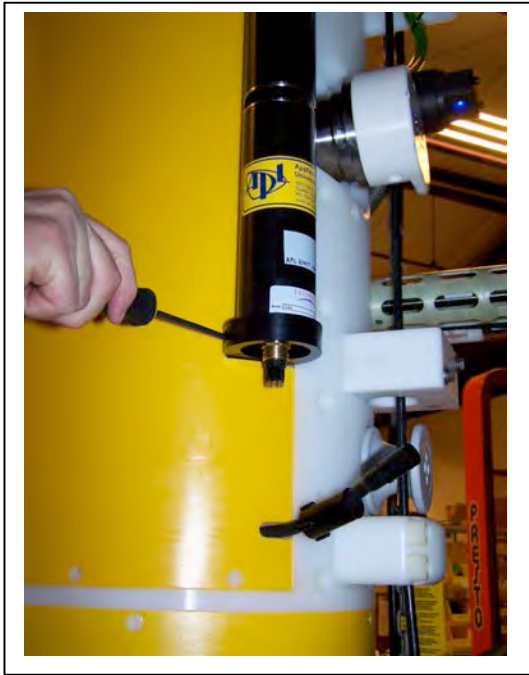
and Figure 8-18: Tightening Bottom and Top Mounting Screws
